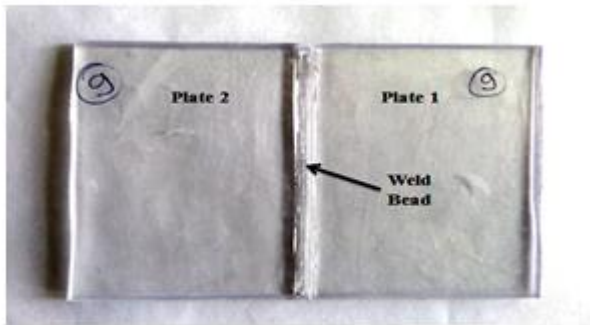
Hot air welded single V butt joint of PMMA sheet
